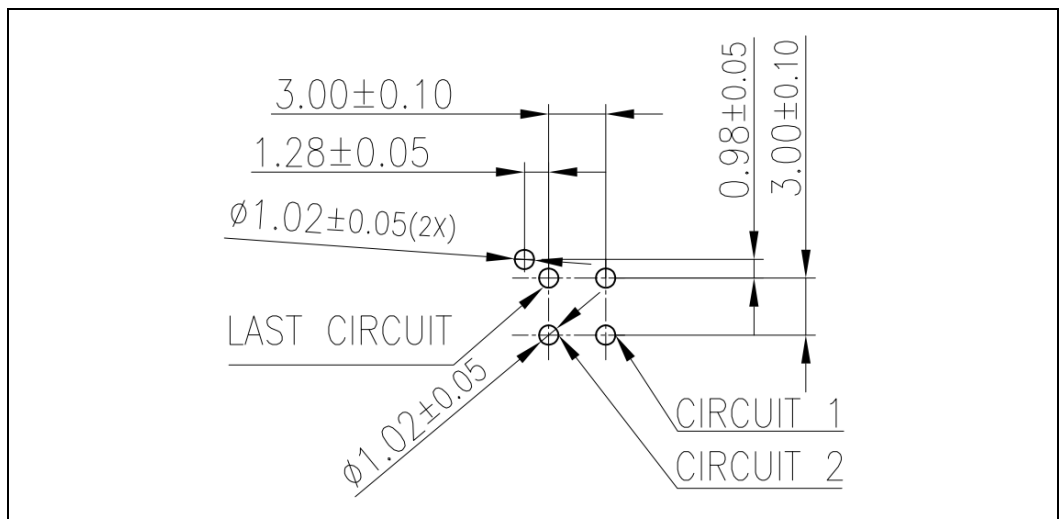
3 mm SATA Power 4 Pin MB Header – Recommended PCB Layout (Top Layer View)
